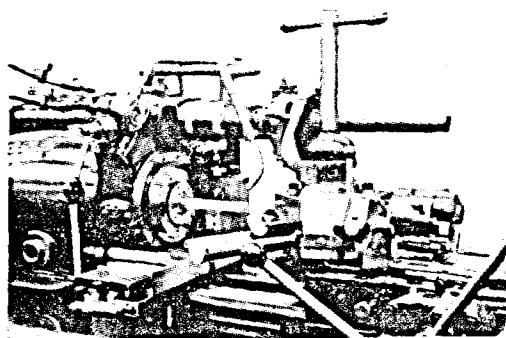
View of air bar chuck with overhead leader screw and tooling equipment.
